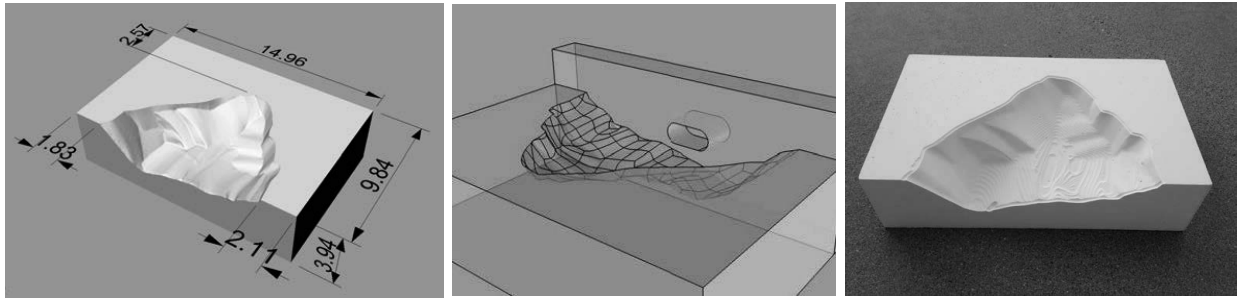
CAD Model for CNC in Rhino and plaster mould cut by CNC
